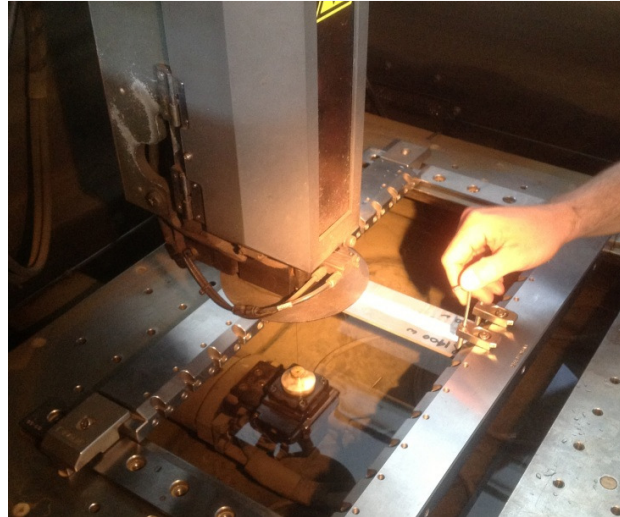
Fixing of the plate for posterior cutting using WEDM.
